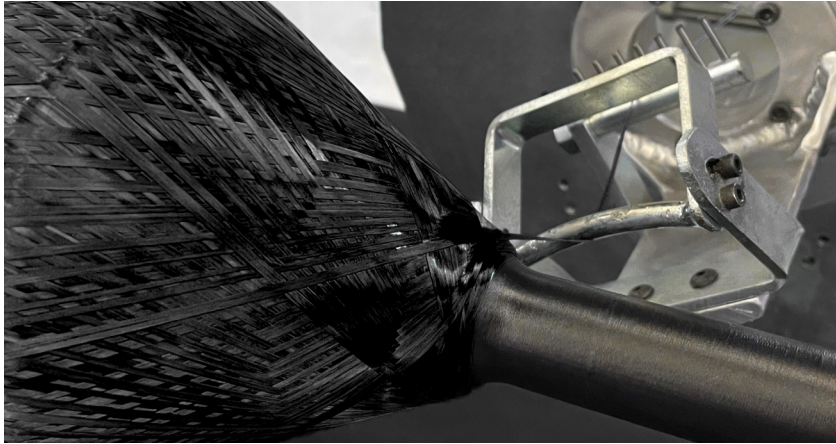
CNC-controlled filament winding machine using a conical mandrel.
